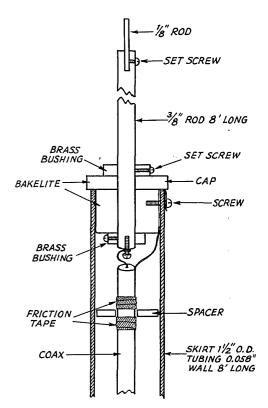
Cutaway view showing the center insulator in place in the skirt and the method of connecting the coax line.
